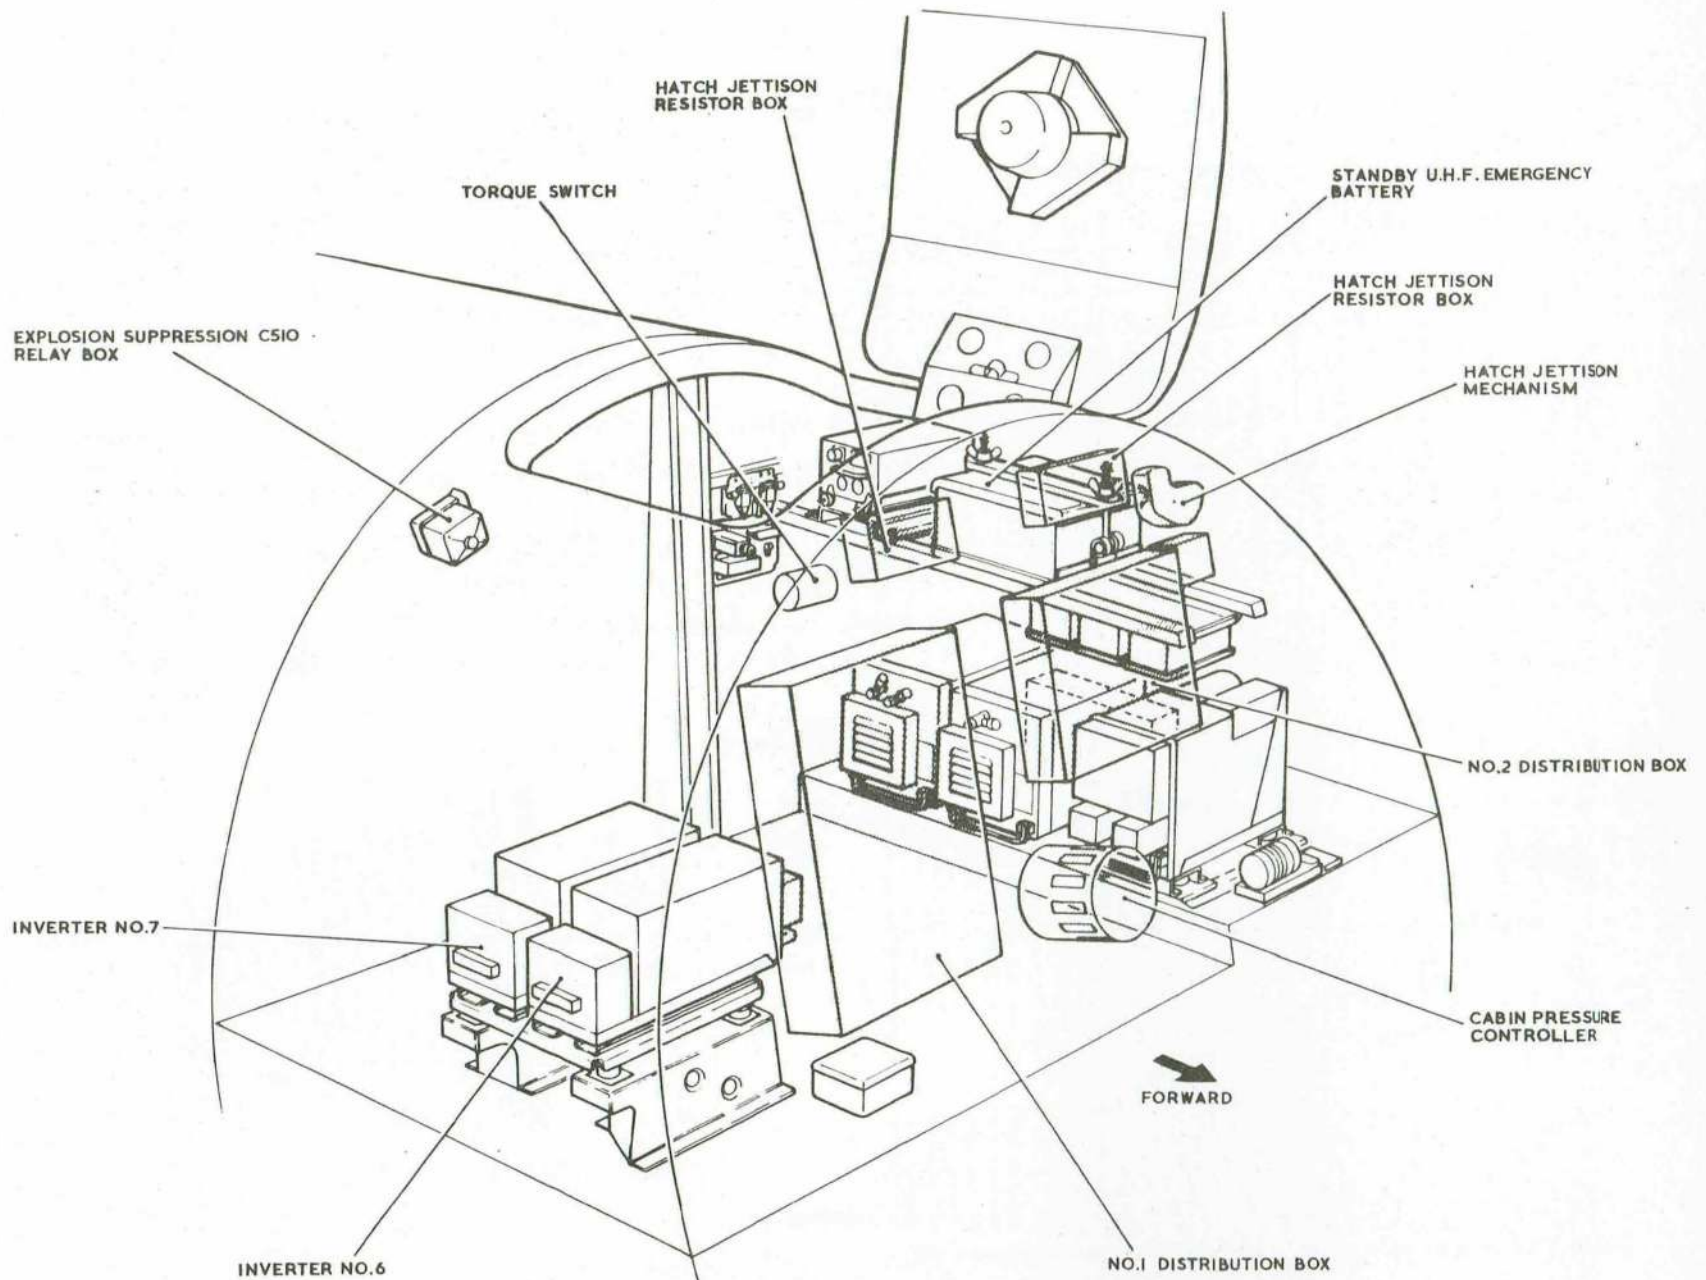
ELECTRICAL INSTALLATION - UPPER EQUIPMENT COMPARTMENT
